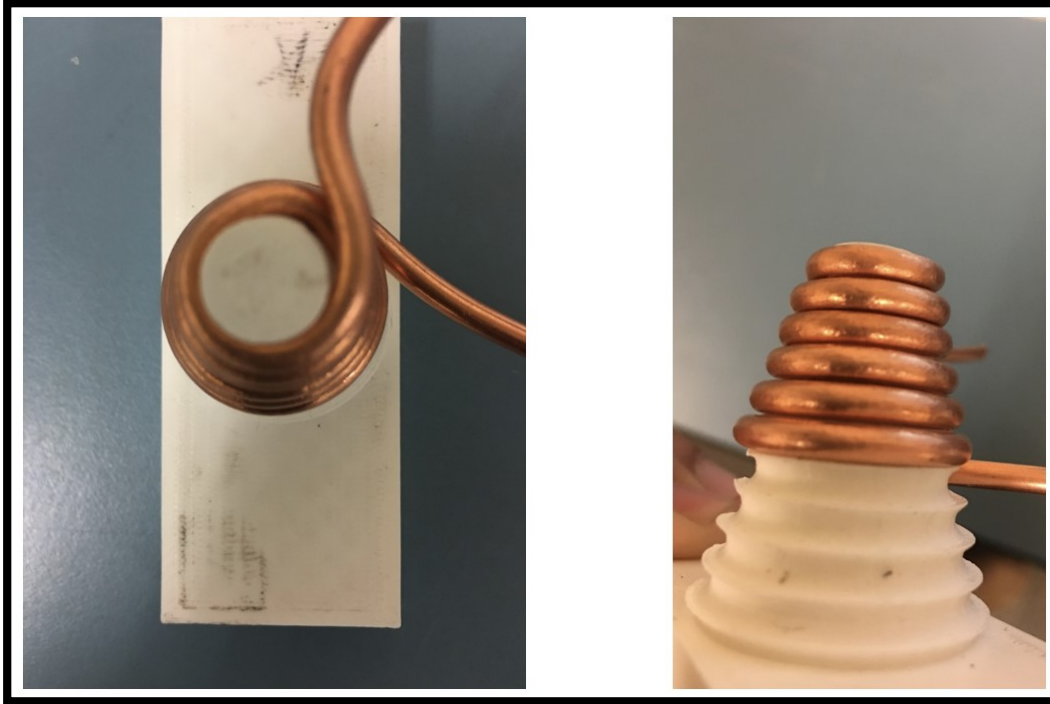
Coil fixture with a “small coil” turned for demonstration purposes
